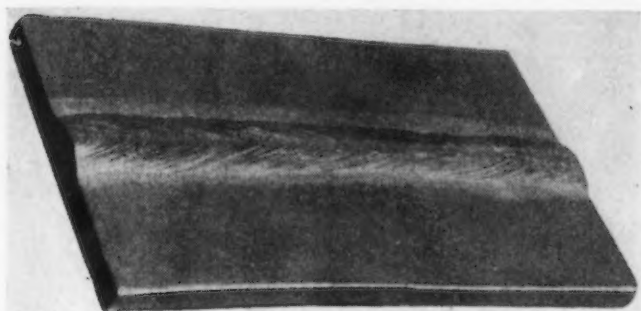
A dense uniform bead of weld metal deposited by automatic carbon arc process on aluminum.
